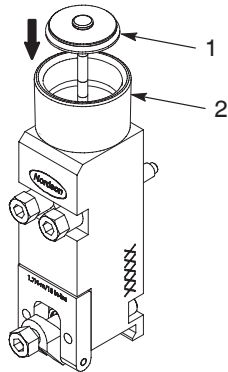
Dropping the needle-and-piston assembly through the piston insertion tool into the module body
